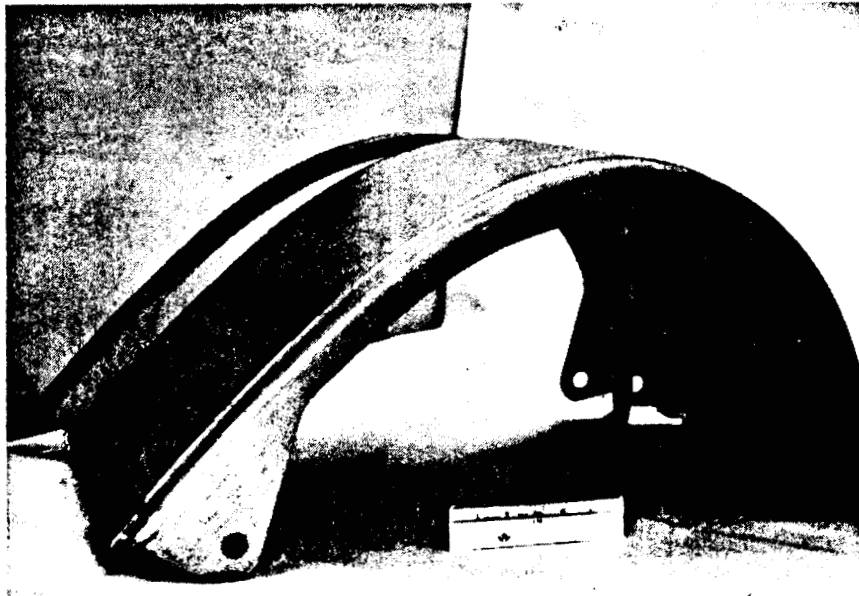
PROTOTYPE LEADING EDGE ASSEMBLY AND SEAL STRIP READY FOR COATING
